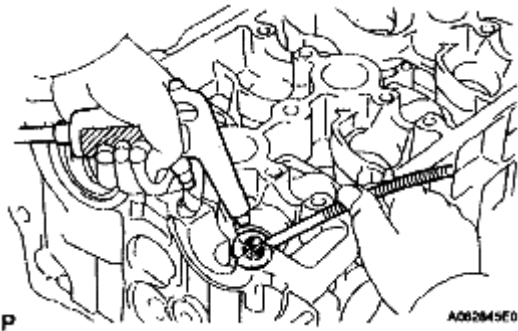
Removing Valve Spring Seat Using Compressed Air And Magnetic Finger
